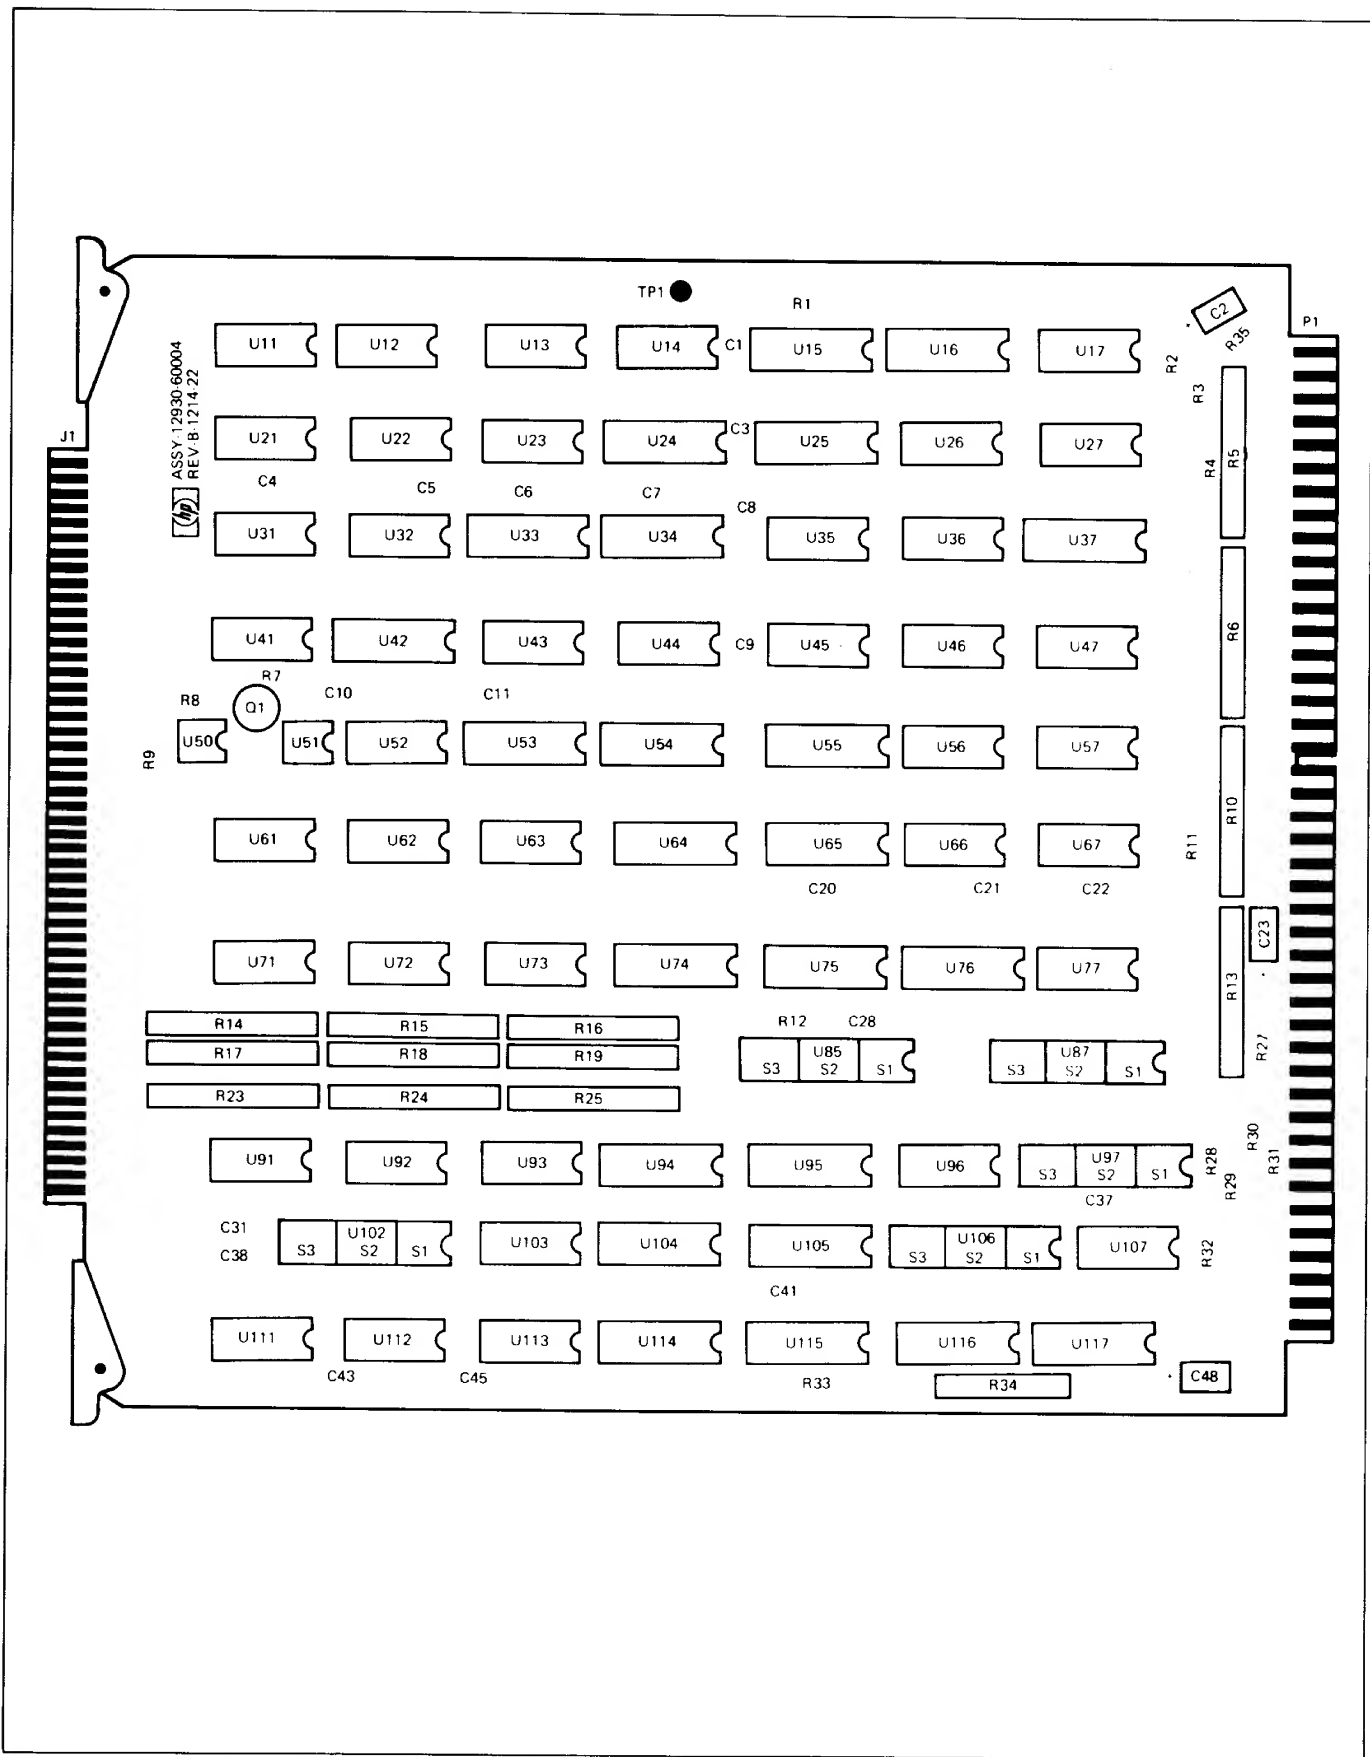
Universal Interface PCA (12930-60004) Parts Location Diagram
